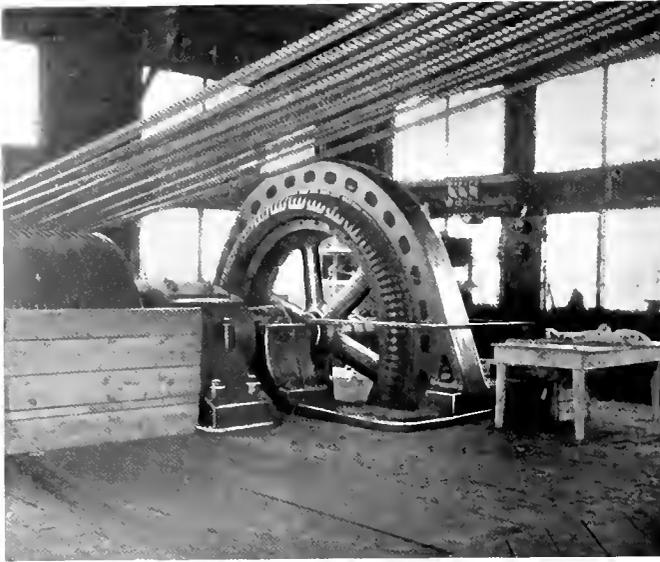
Induction Motor Driving 30 in. Four-Stand Sheet Mill
